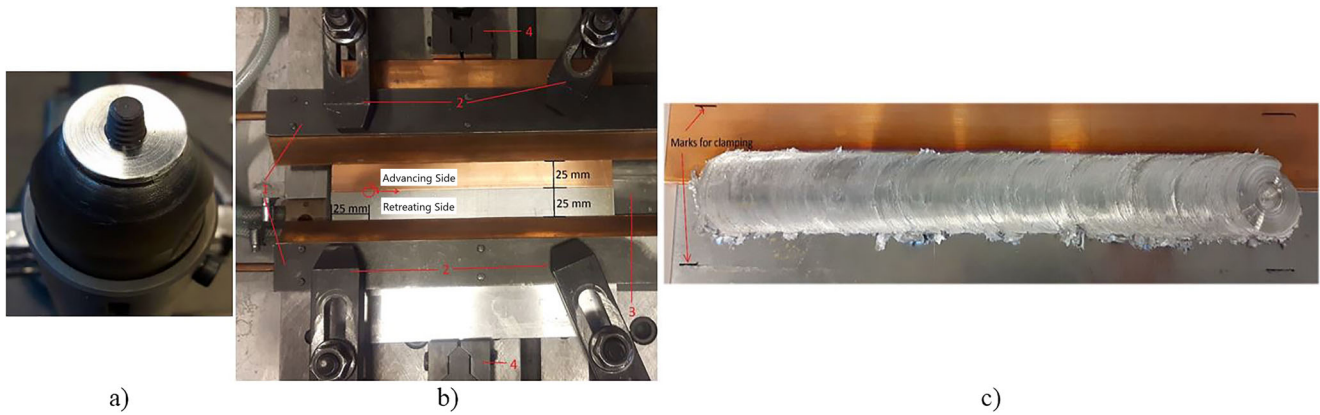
The FSW welding conditions: (a) tool with a concave shoulder and taper LH-threaded probe; (b) the clamping system with the (1) refrigerated Cu clamping bars and (2) steel clamps, (3) refrigerated baking anvil,
